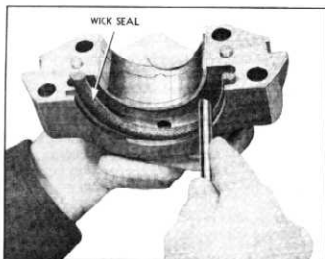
Rolling Rear Bearing Cap Oil Seal into Groove
